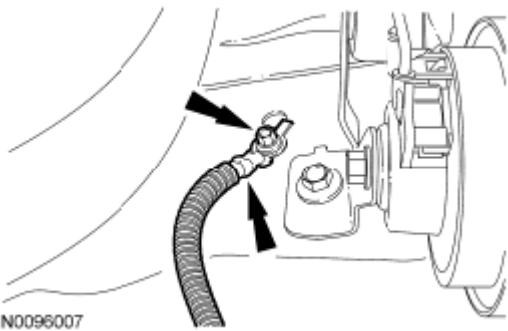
Locating Electronic Power Assist Steering System Wiring Harness Ground & Bolt
